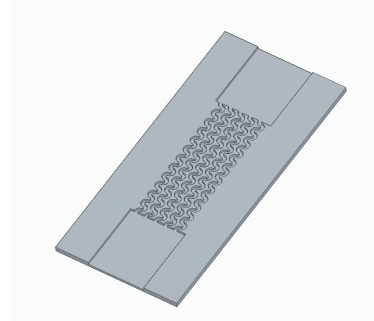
Example CAD model of a VLM thruster chip without nozzle. The glass layer was removed for clarity.
